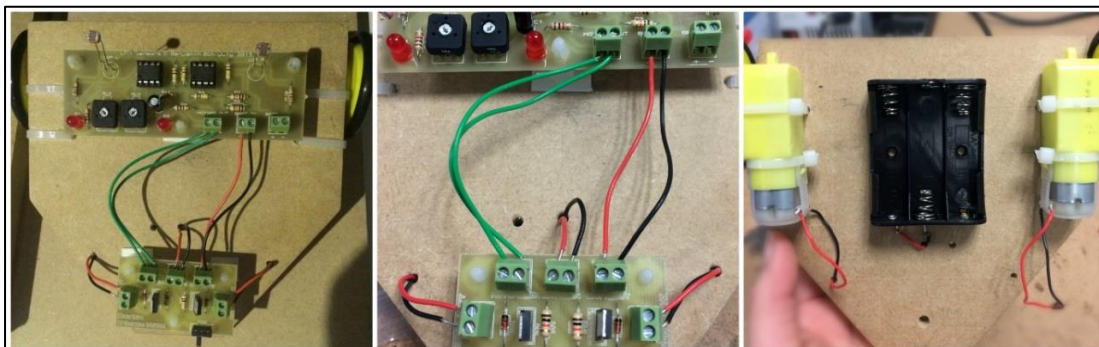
Robot’s base with PCB 1 and 2 connected to the motor wheels and battery holder for the first time.
